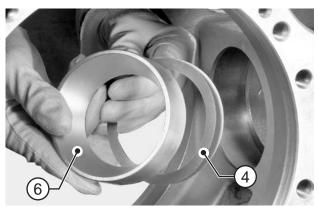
Remove the thrust block of the internal bearing (6) as well as the shim washers (4).
